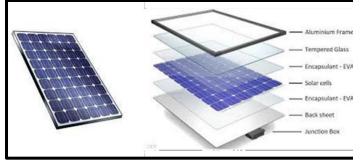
(left) Solar Panel (right) Exploded View of the internal components of the Solar Panel
